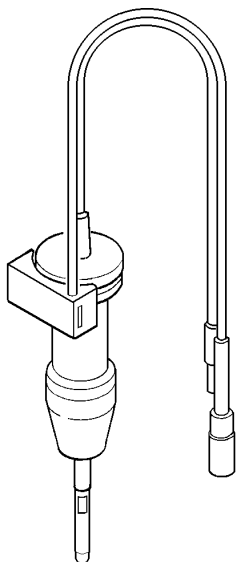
D-43. Tip Jamming Switch Cable and Nozzle Head
